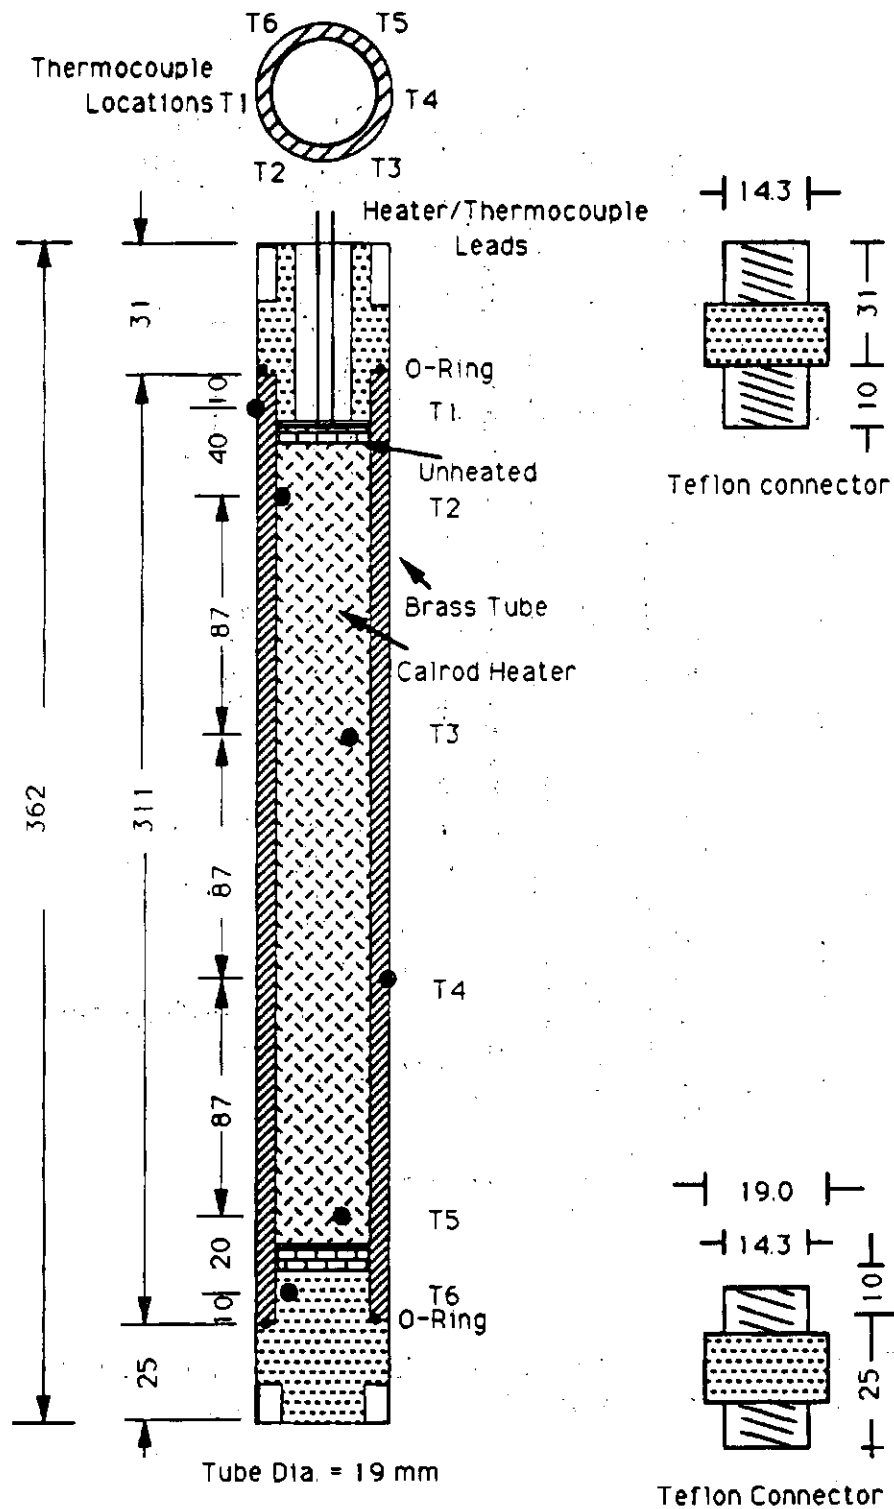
A. Design details of the heated section of the heat-transfer probes and thermocouple locations used in the thirty-seven tube bundle.
